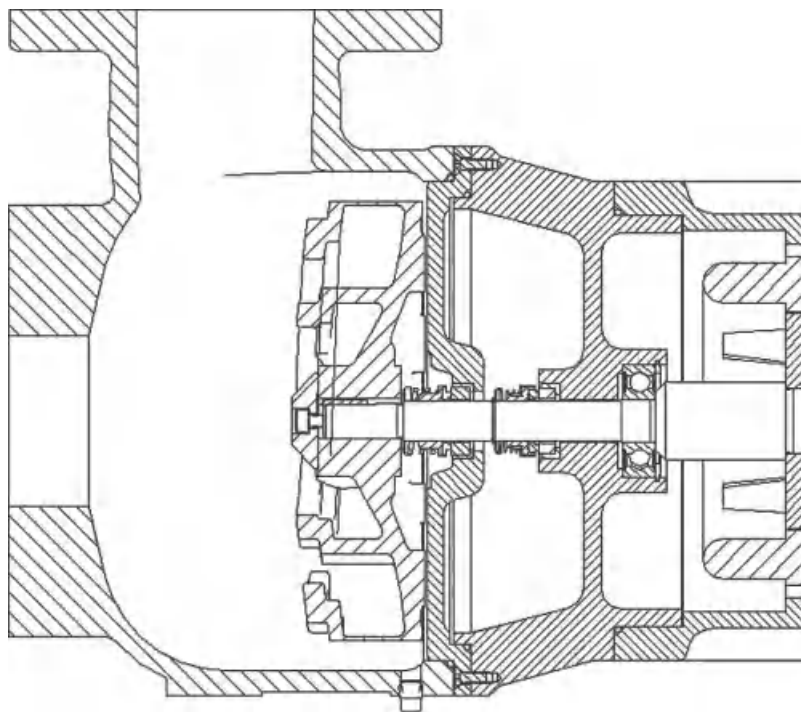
In this cross-sectional drawing, one can easily see the flow path that exists inside a vortex pump. While vortex pumps use semiopen impellers, there is not a wear plate against which the impeller spins. (Courtesy of The Gorman-Rupp Company.)
